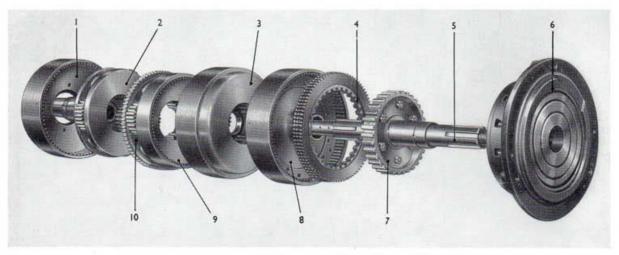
EXPLODED VIEW OF RUNNING GEAR (VIEWED FROM INPUT END).
